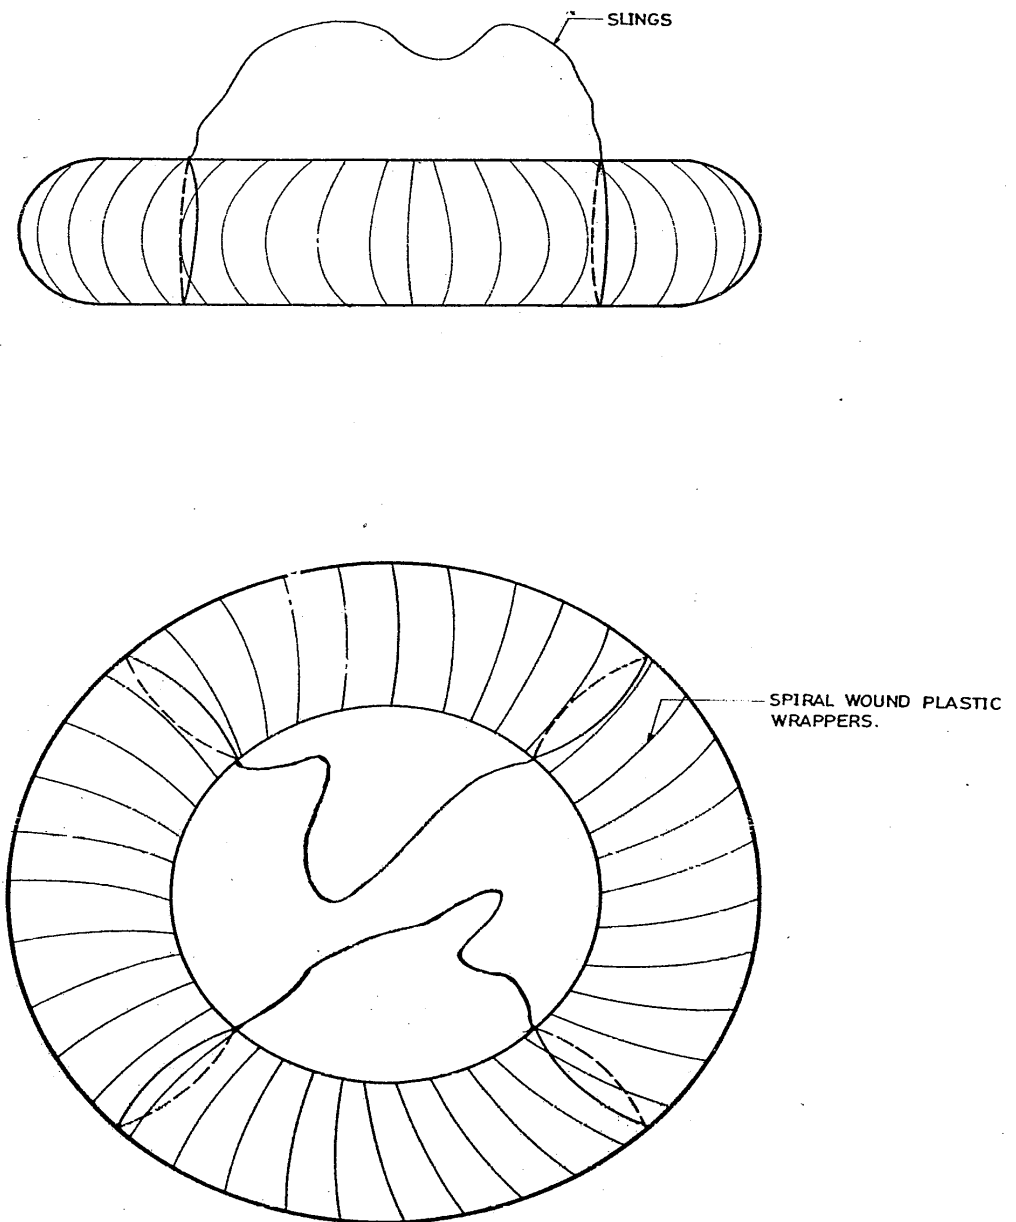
SLING ARRANGEMENT FOR LIFTING 63mm ϕ COILS
